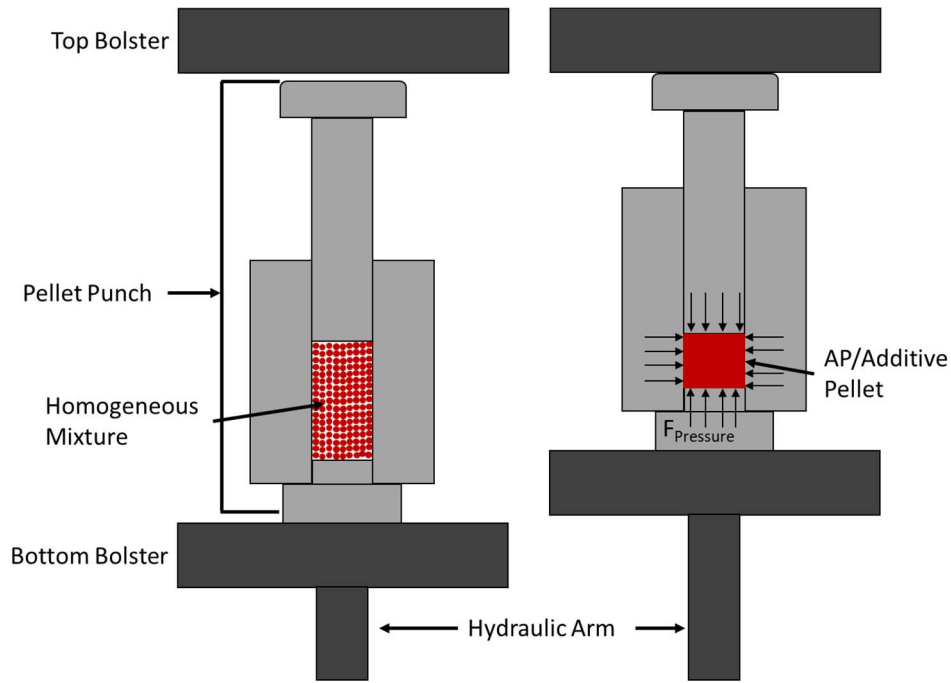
(left) Pellet punch with uncompressed mixture. (right) Force applied through the extension of the hydraulic arm to compact the mixture and create a pellet.
